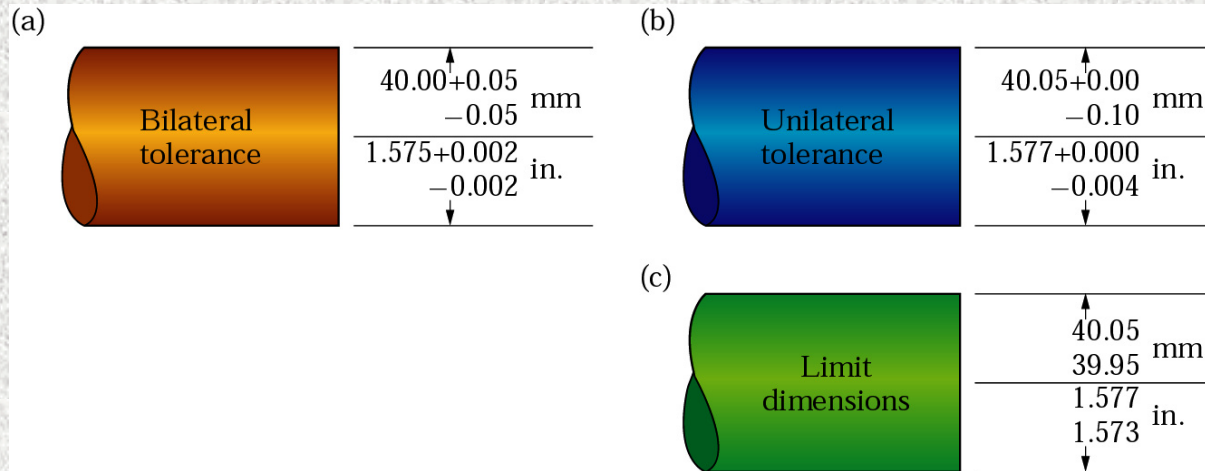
Various methods of assigning tolerances on a shaft. Source: L. E. Doyle.
